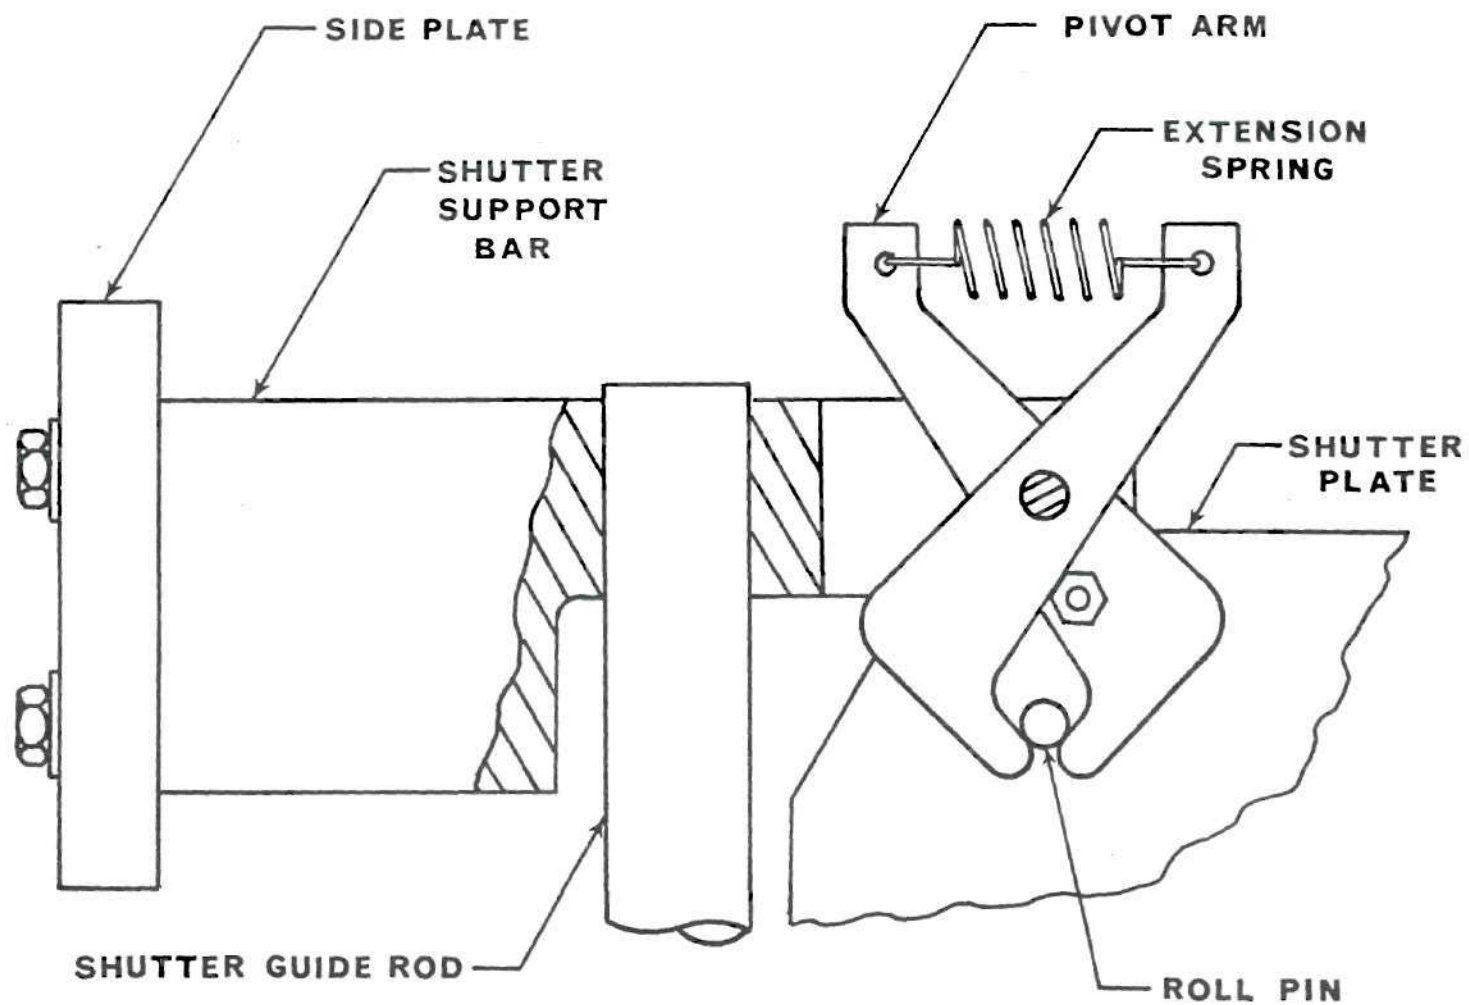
Side View of the Shutter Support Assembly with Attached Shutter
